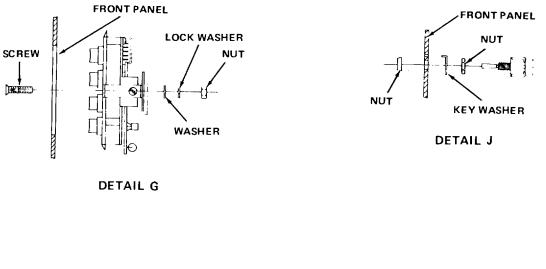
VOR Local Control Front Panel and Chassis-Mounted Parts Location Diagram (Sheet 3 of 4)
